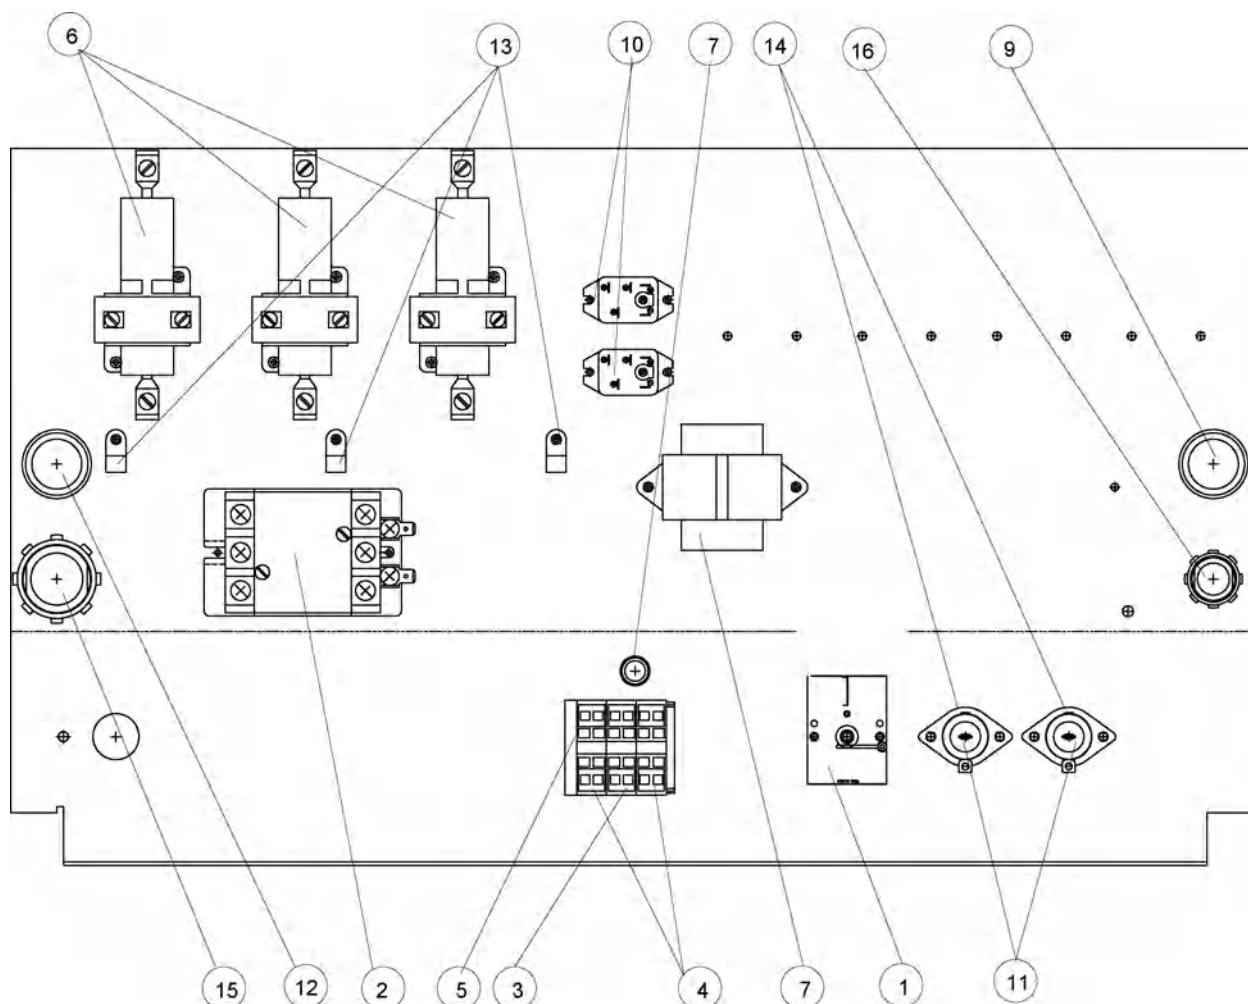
Quick Disconnect AssemblyTable 9. Quick Disconnect Assembly Parts
